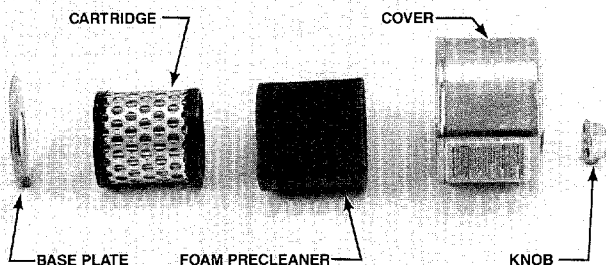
The 3½-horsepower engine's air cleaner assembly.
